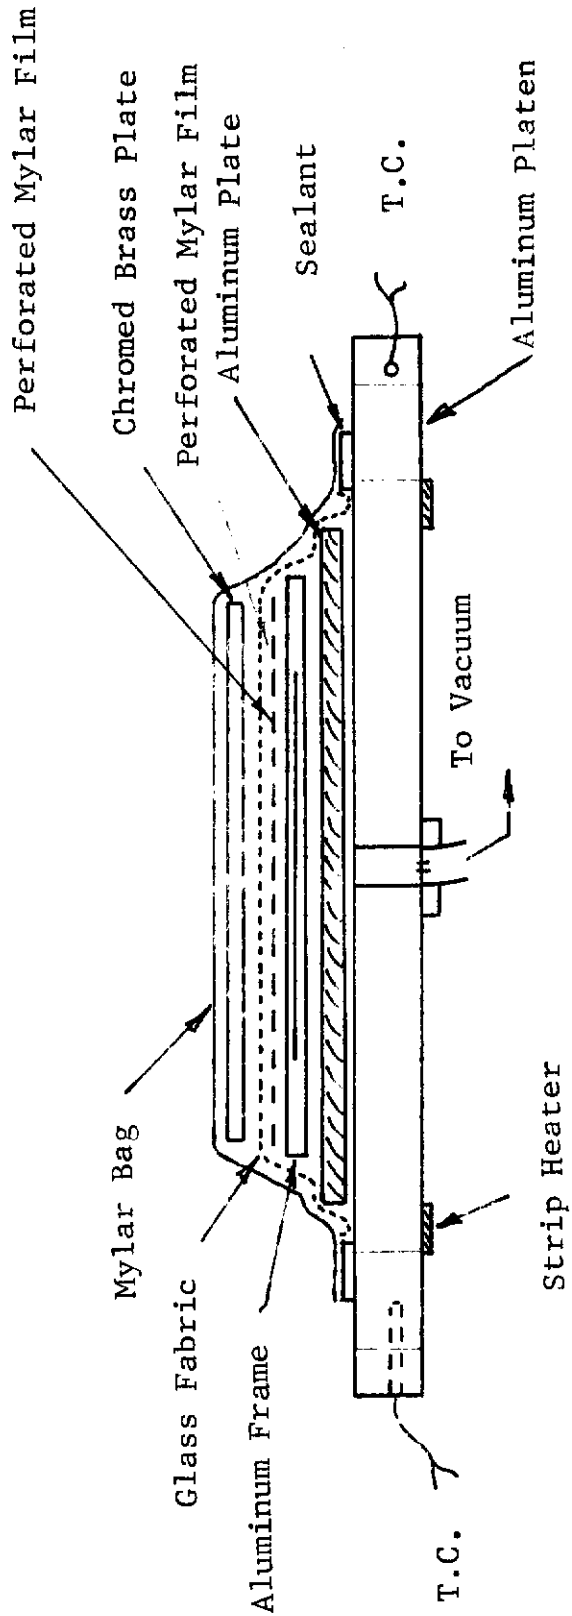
VACUUM BAG SYSTEM FOR FILM FABRICATION
